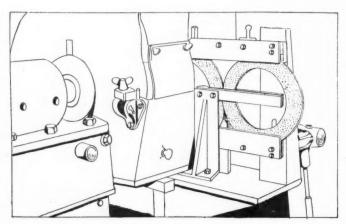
Fixture for grinding molded asbestos disks in Gardner disk grinder
